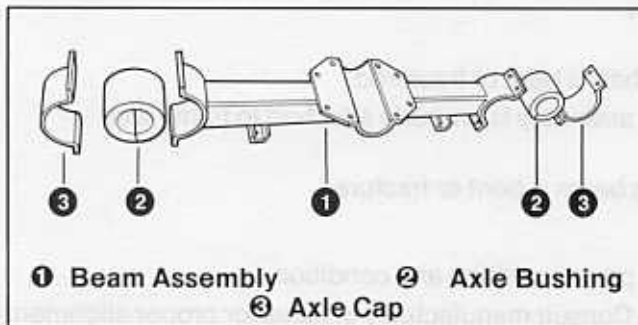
Rubber Axle Bushing Installation on MOR/ryde Beam Assembly
